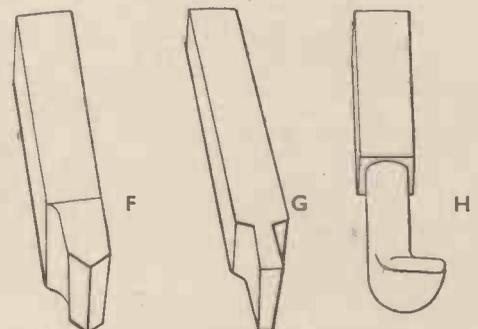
F. Screw cutting. G. Parting off or grooving. H. Boring; also made square-edged.
